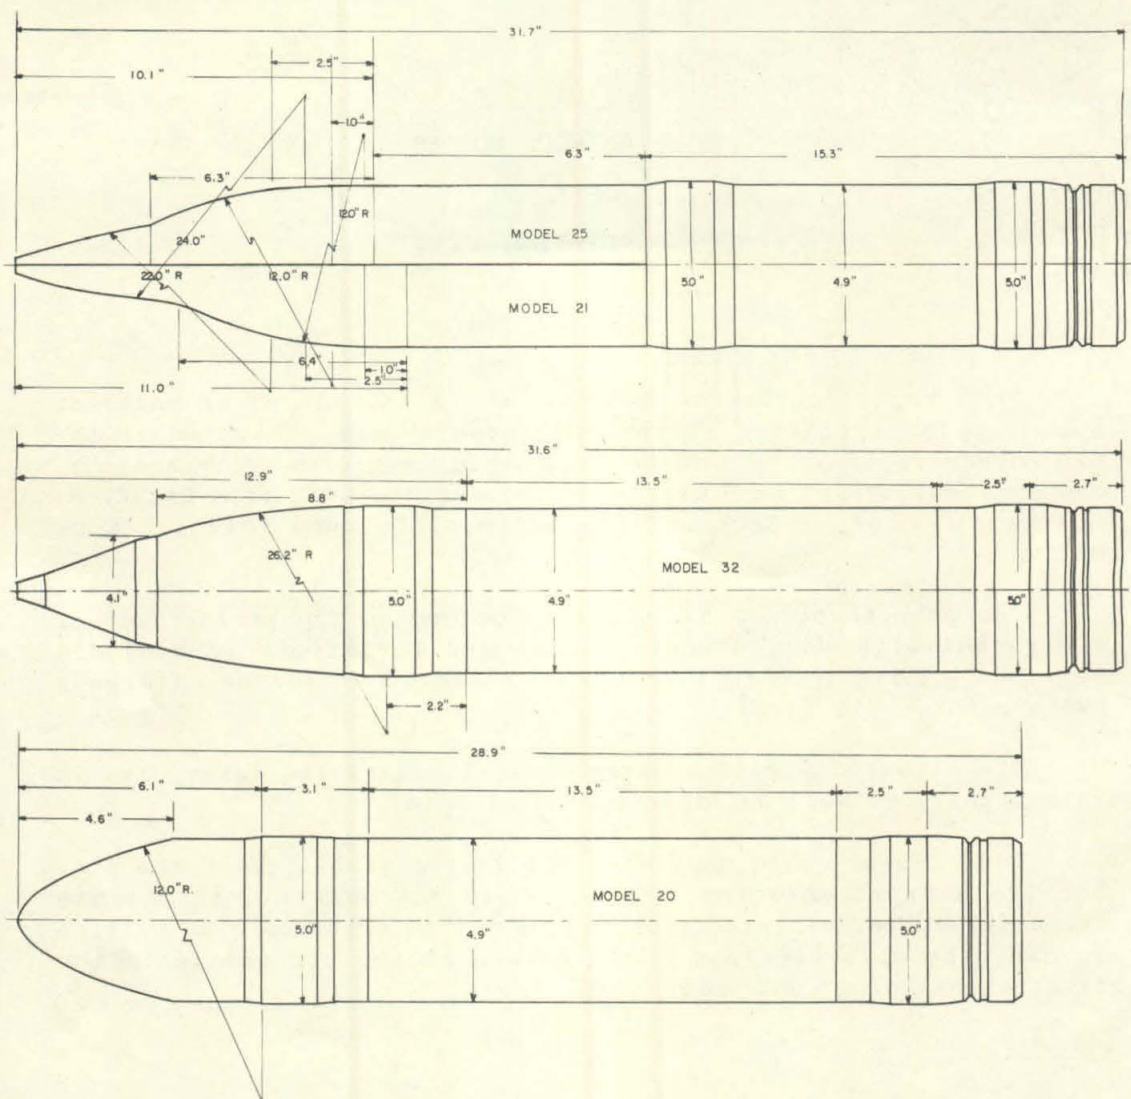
OUTLINE DRAWINGS OF PROJECTILE SHOWING THE FOUR MODELS
